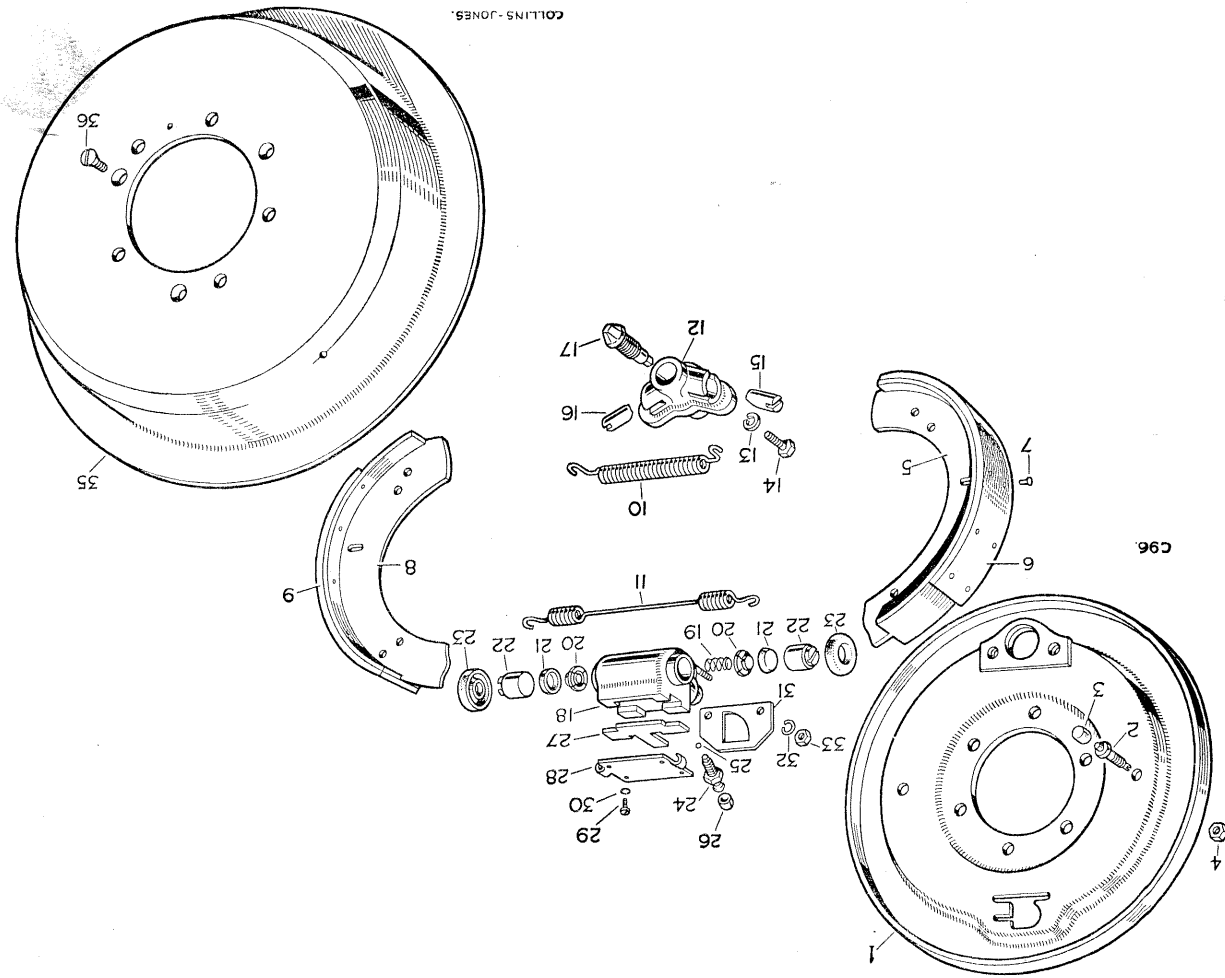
Layout of rear wheel brake unit, 117 brakes—109 models
